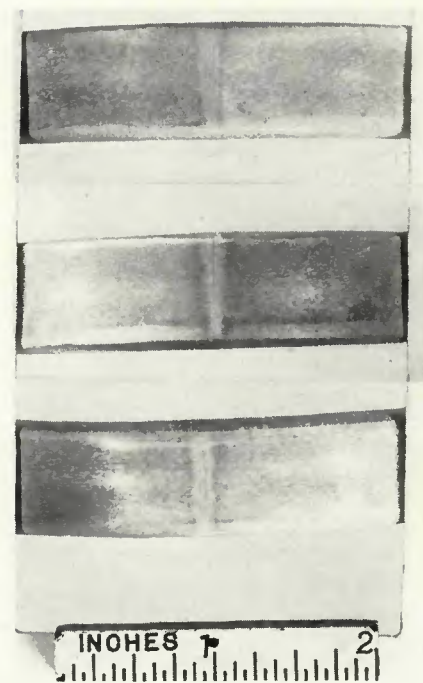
Side bends, aluminum alloy 5086-H116 electron beam weld
